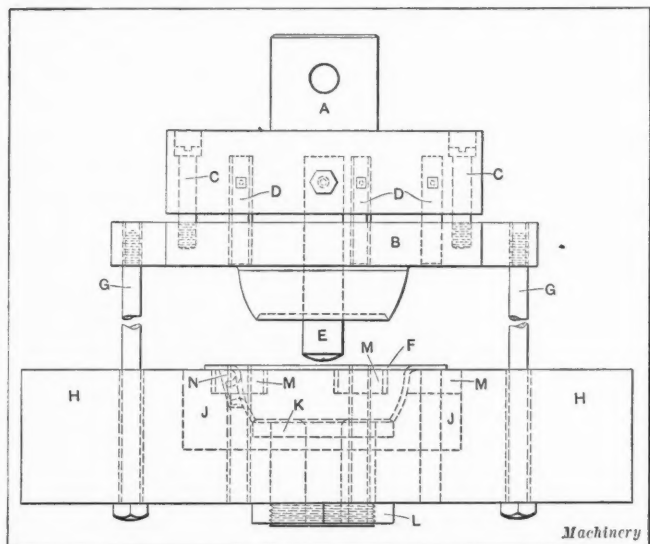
Punch and Die for piercing Holes in Flange, beveling Bottom Edge of Shell and truing up Work
